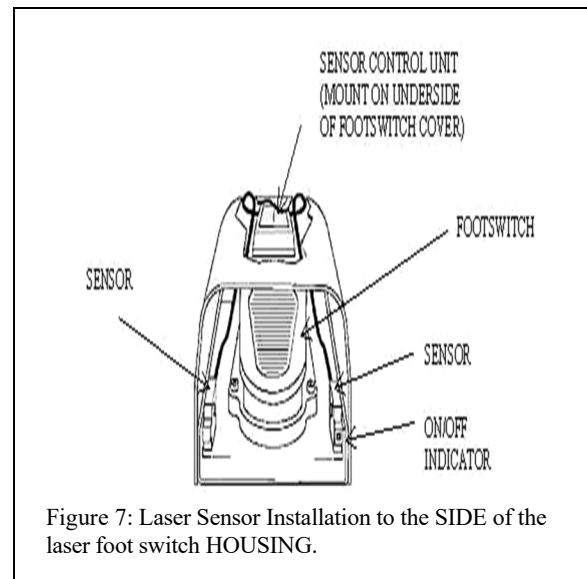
Laser Sensor Installation to the SIDE of the laser foot switch HOUSING.
